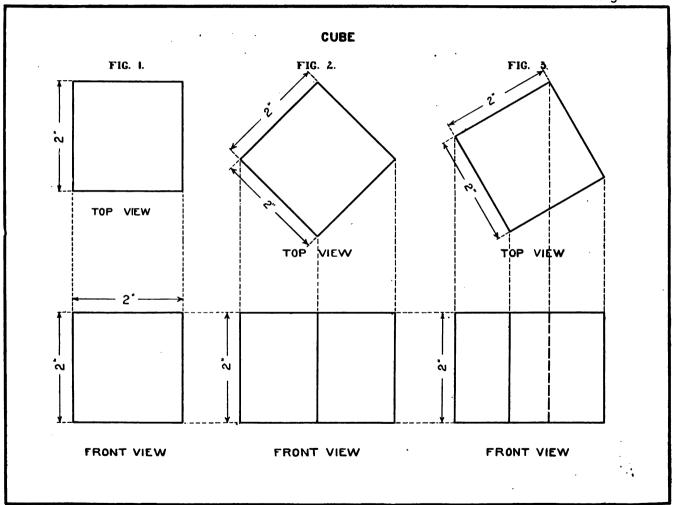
represents the cube turned in the top view so that its edges make angles of 45° with an imaginary horizontal line.
